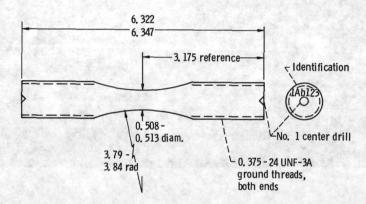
Hourglass fatigue specimen. (All dimensions in cm.)
